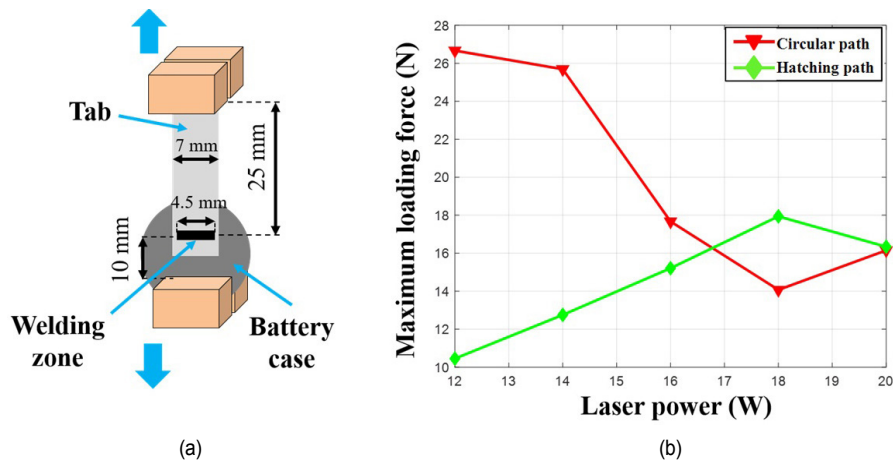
Mechanical strength of the weld: (a) measurement setup; (b) mechanical strength.
